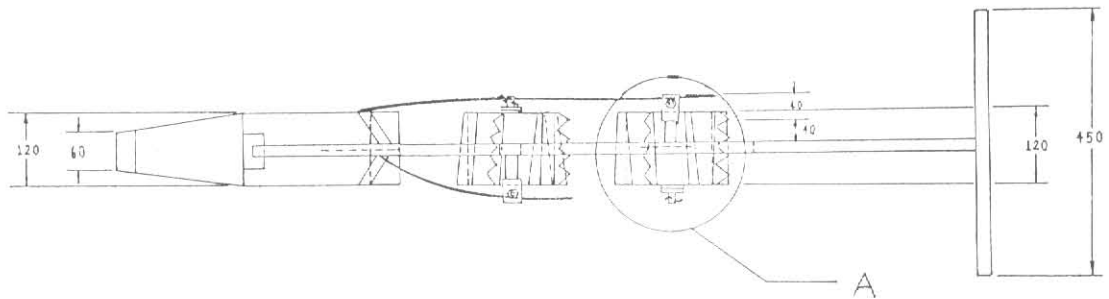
Top view of rotary weeder (scale 1 : 10, dimensions in millimeters).
